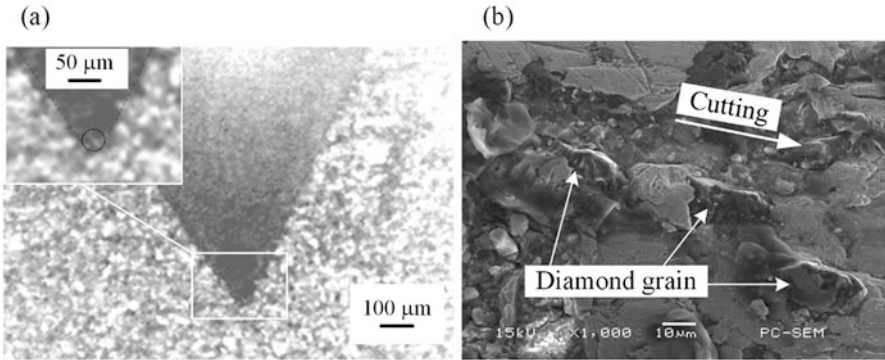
The sharpened SD600 wheel after Medical Mutual-wear dressing: (a) wheel micro-tip shape and (b) microscopic grain protrusion
